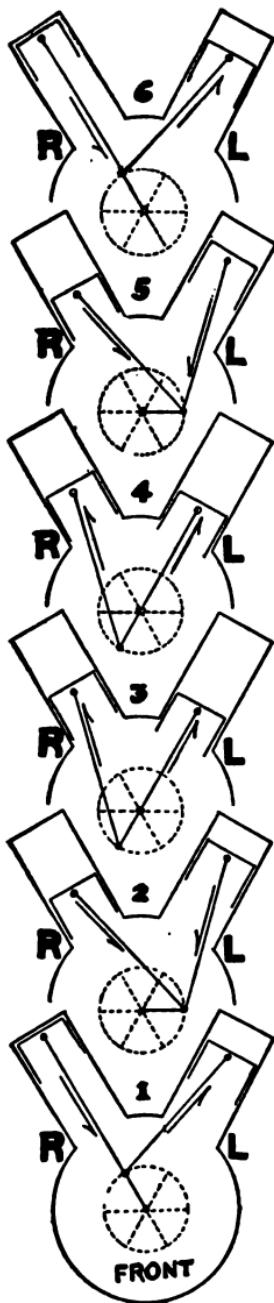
Diagram of the cylinders, pistons and crank positions in the Packard twelve-cylinder engine, as viewed from the front of the car, when the piston of cylinder R1 is at the beginning of the working stroke. The relative positions of the other pistons, as indicated, are as follows: L₁ at 120° suction; R₂ at 60° working; L₂ at 90° suction; R₃ at 120° exhaust; L₃ at 1° compression; R₄ at 60° compression; L₄ at 1° exhaust; R₅ at 120° working; L₅ at 60° suction; R₆ at 1° suction; L₆ at 120° compression. Each of the four stages of the four-part cycle is represented at the beginning, second, third and third third of the stroke of 180° in three of the cylinders. The dotted circles indicate the paths of the cranks; the heavy lines the cranks and pitmans. The arrows indicate the direction of movement of the pistons.
